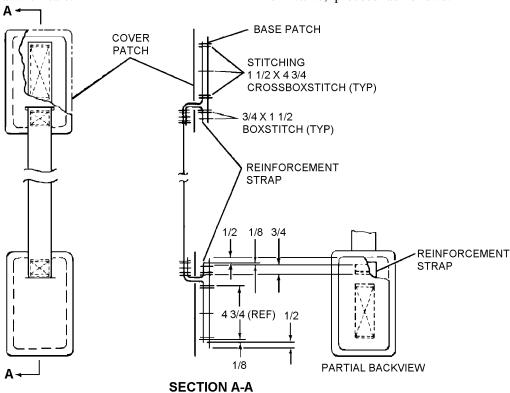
Fabrication of Boarding Stirrup Assembly
